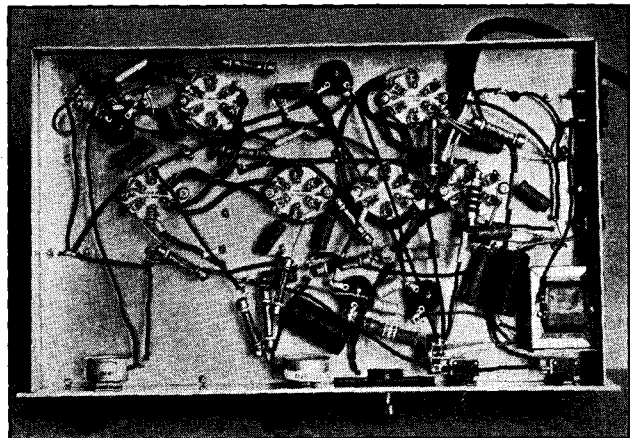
A BOTTOM VIEW OF THE SIX-TUBE SUPERHET
